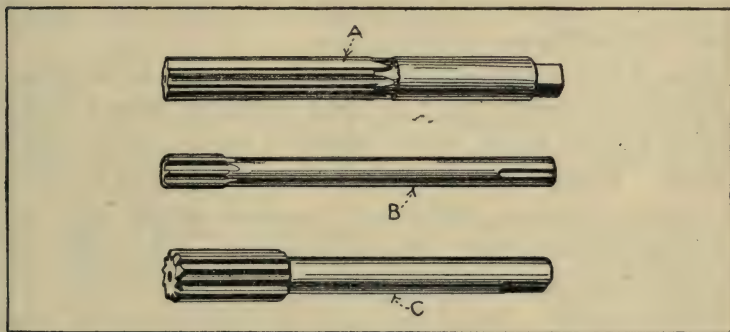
(A) HAND REAMER. (B) PLAIN FLUTED CHUCKING REAMER. (C) ROSE CHUCKING REAMER
